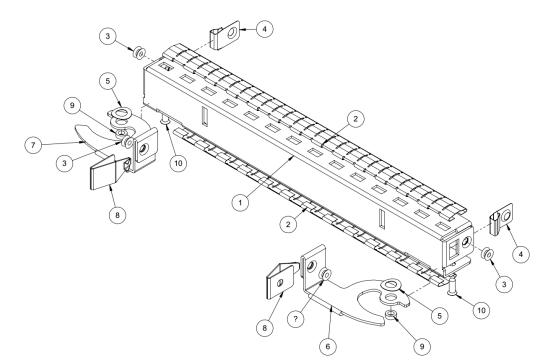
Large Card I/O Bracket with Ejector (3D View)
